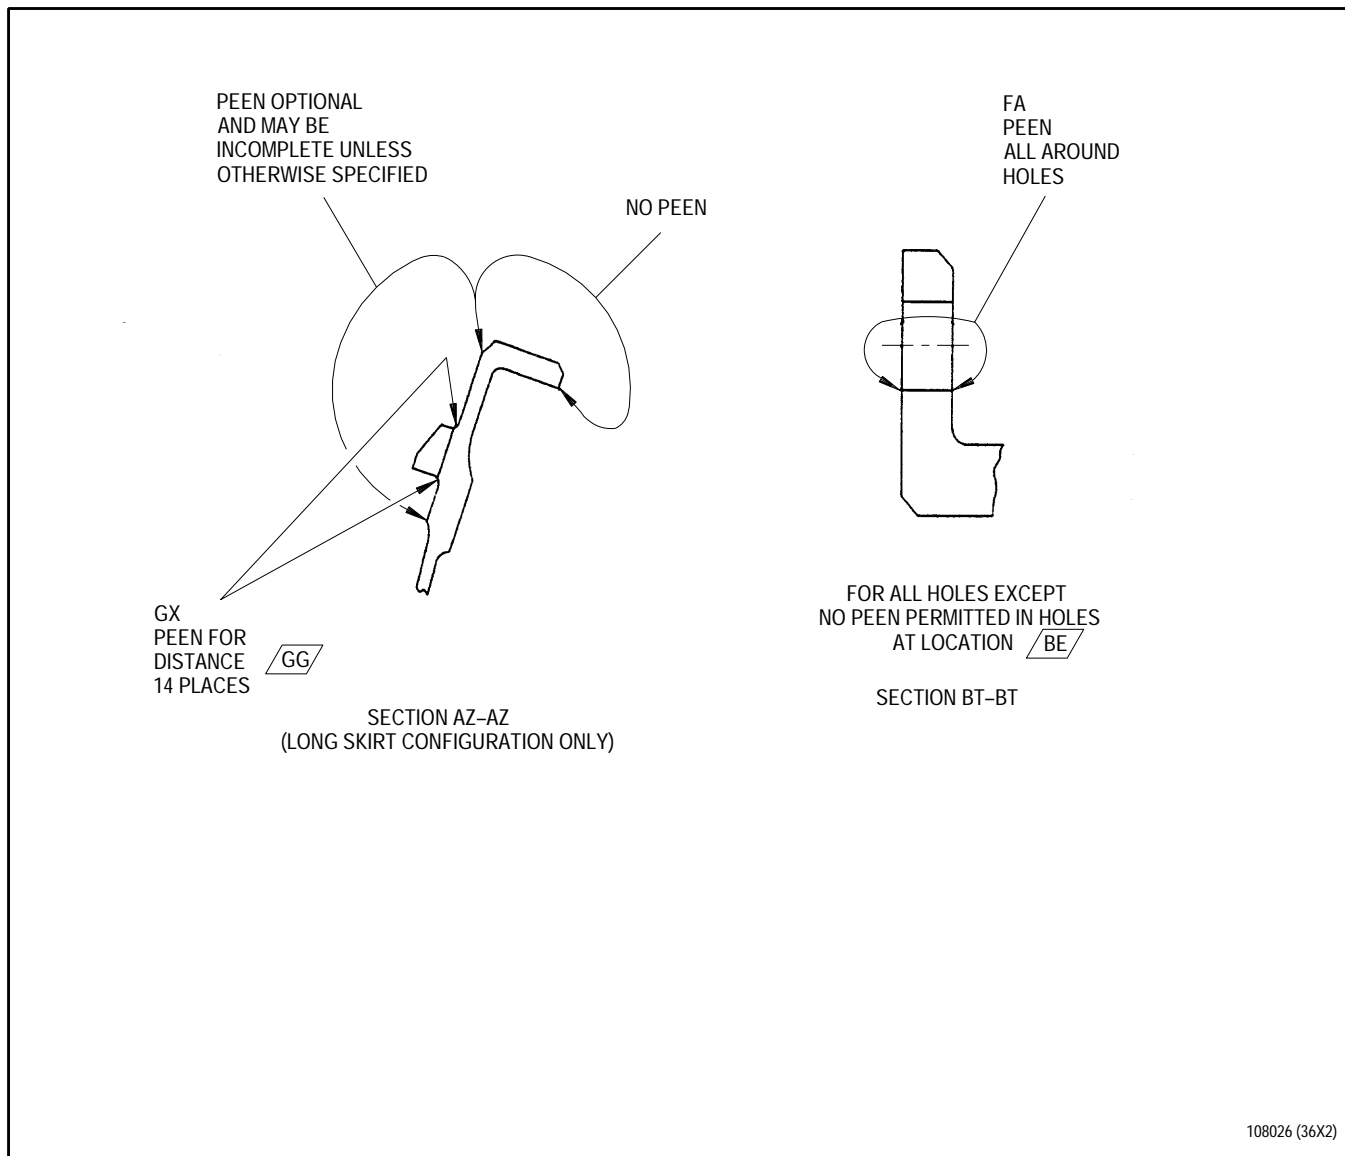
Diffuser Case Assembly - Shotpeen Requirements (Sheet 6 of 6)
